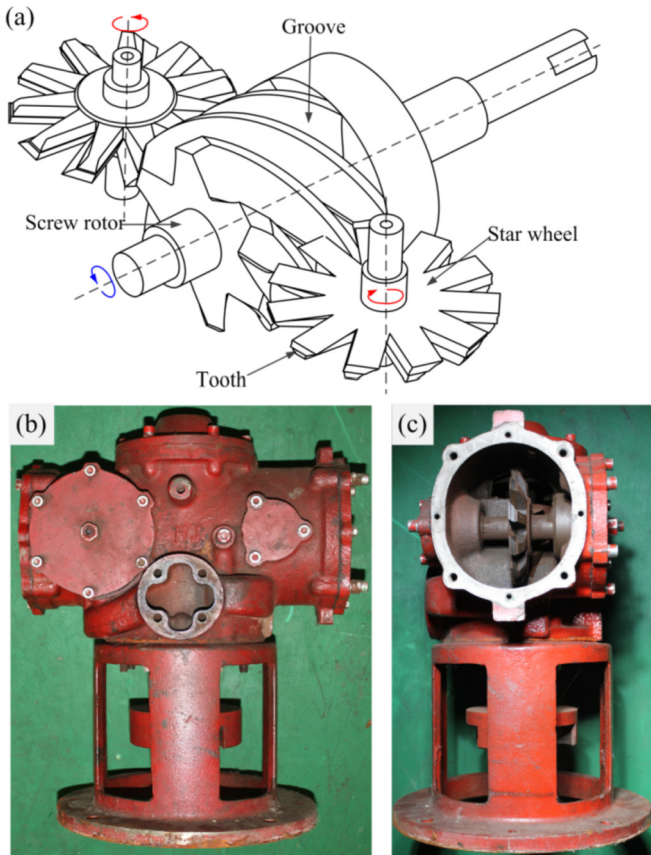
Single screw expander (a: the screw coupling with two star wheels, b: front view of the expander, c: side view of the expander for internal structure).
